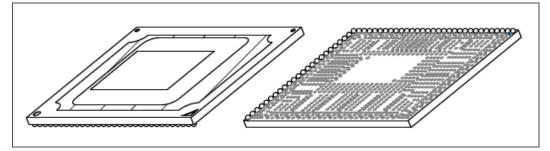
3-D View of Top/ Bottom of BGA1023 4C/2CF Package for the 2nd Generation Intel® Core™ Processor Family Mobile
